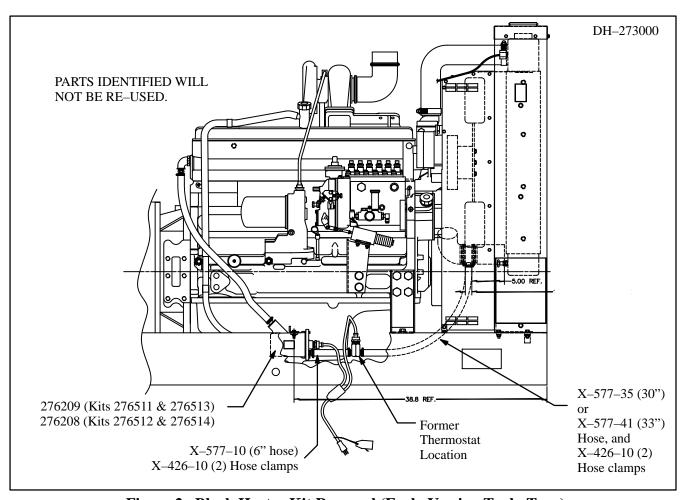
Block Heater Kit Removal (Early Version Tank-Type)
